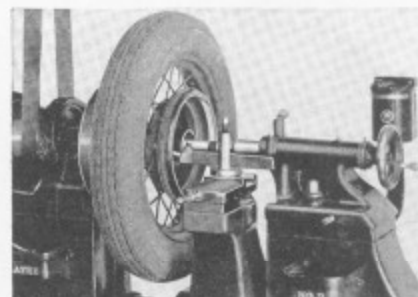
Truing Brake Drum of a Wire Wheel with Tire Attached.
